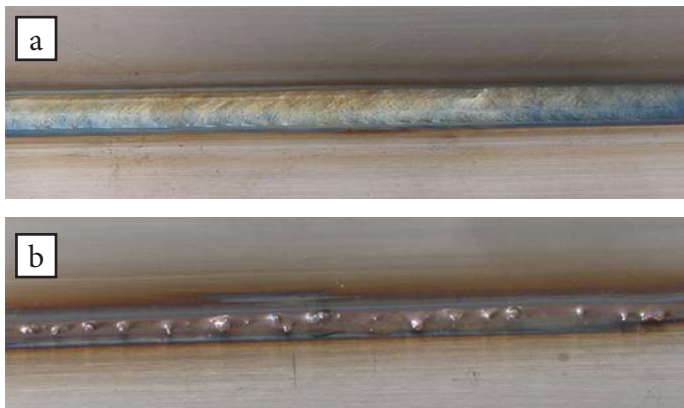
Face (a) and root (b) of the fillet weld with irregular excessive melt-through of the element being welded and excess penetration beads
